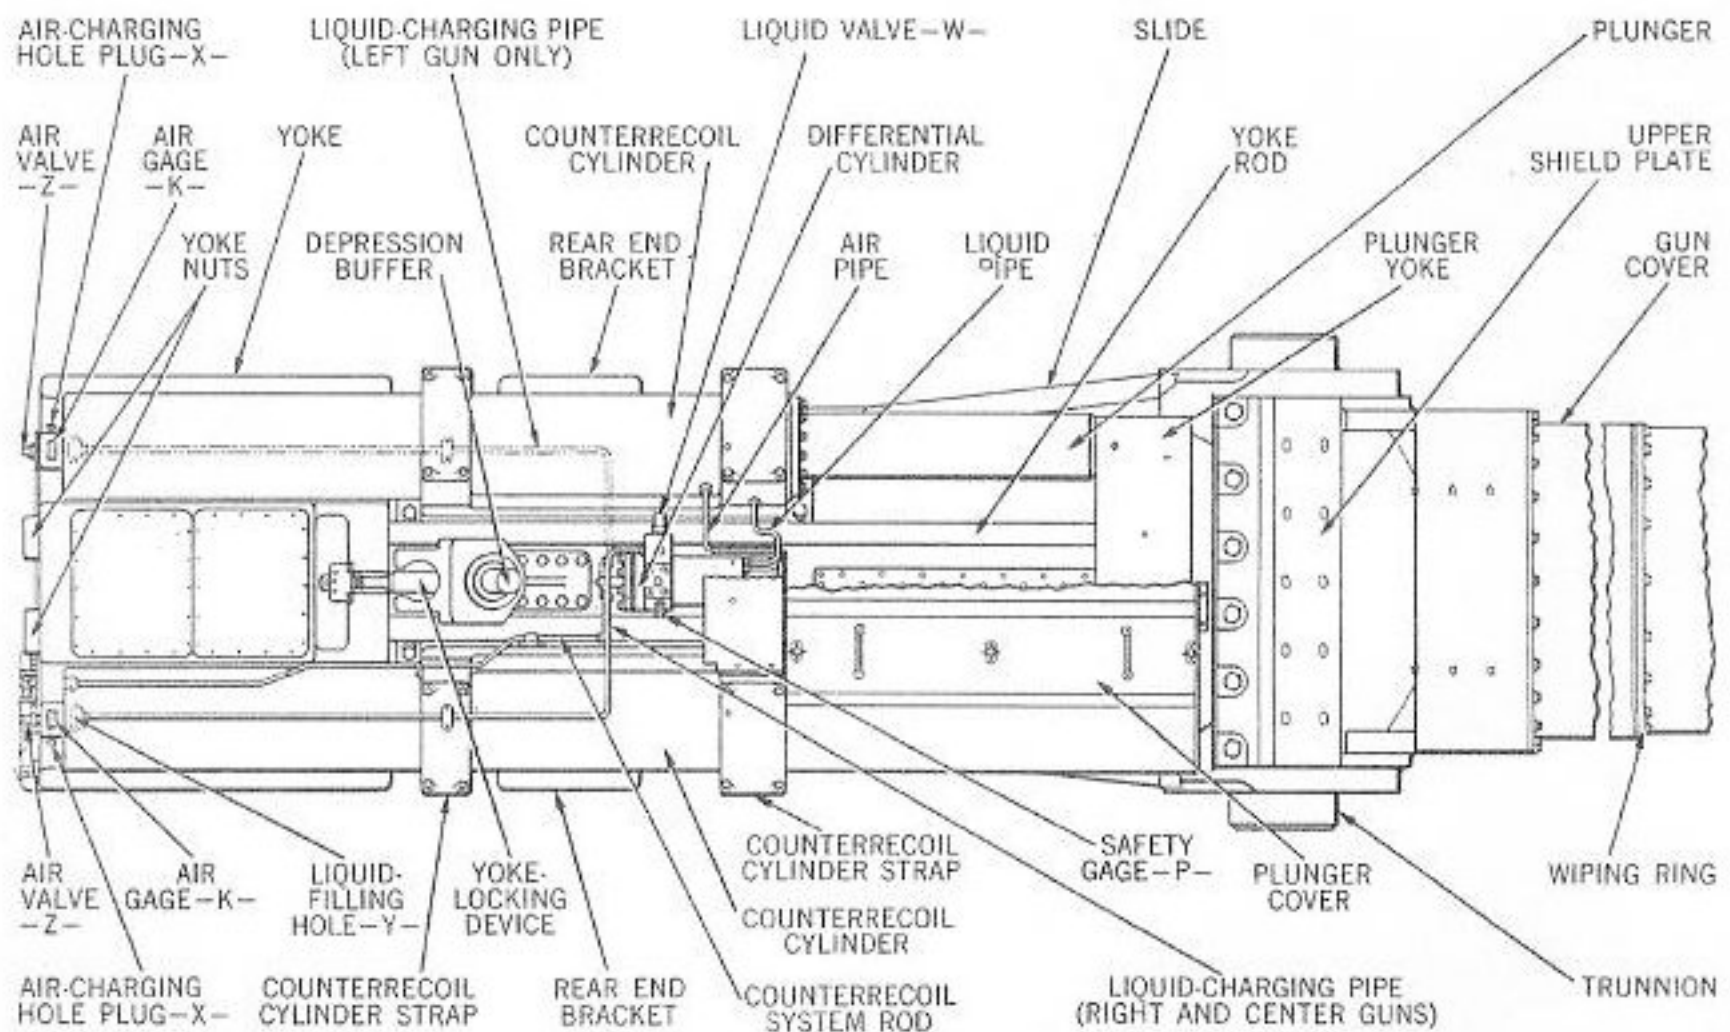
16-inch Slide Mk 6 Mod 0, General Arrangement, Plan View
